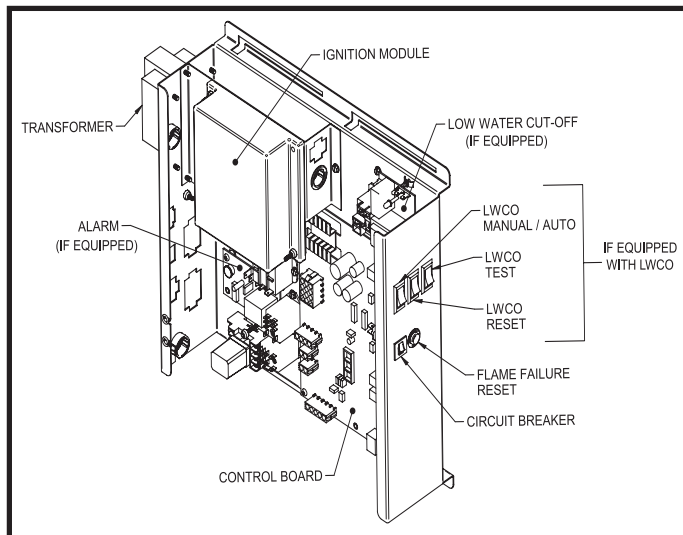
M9 Slide Out Control Panel Opened to Show Component Locations
